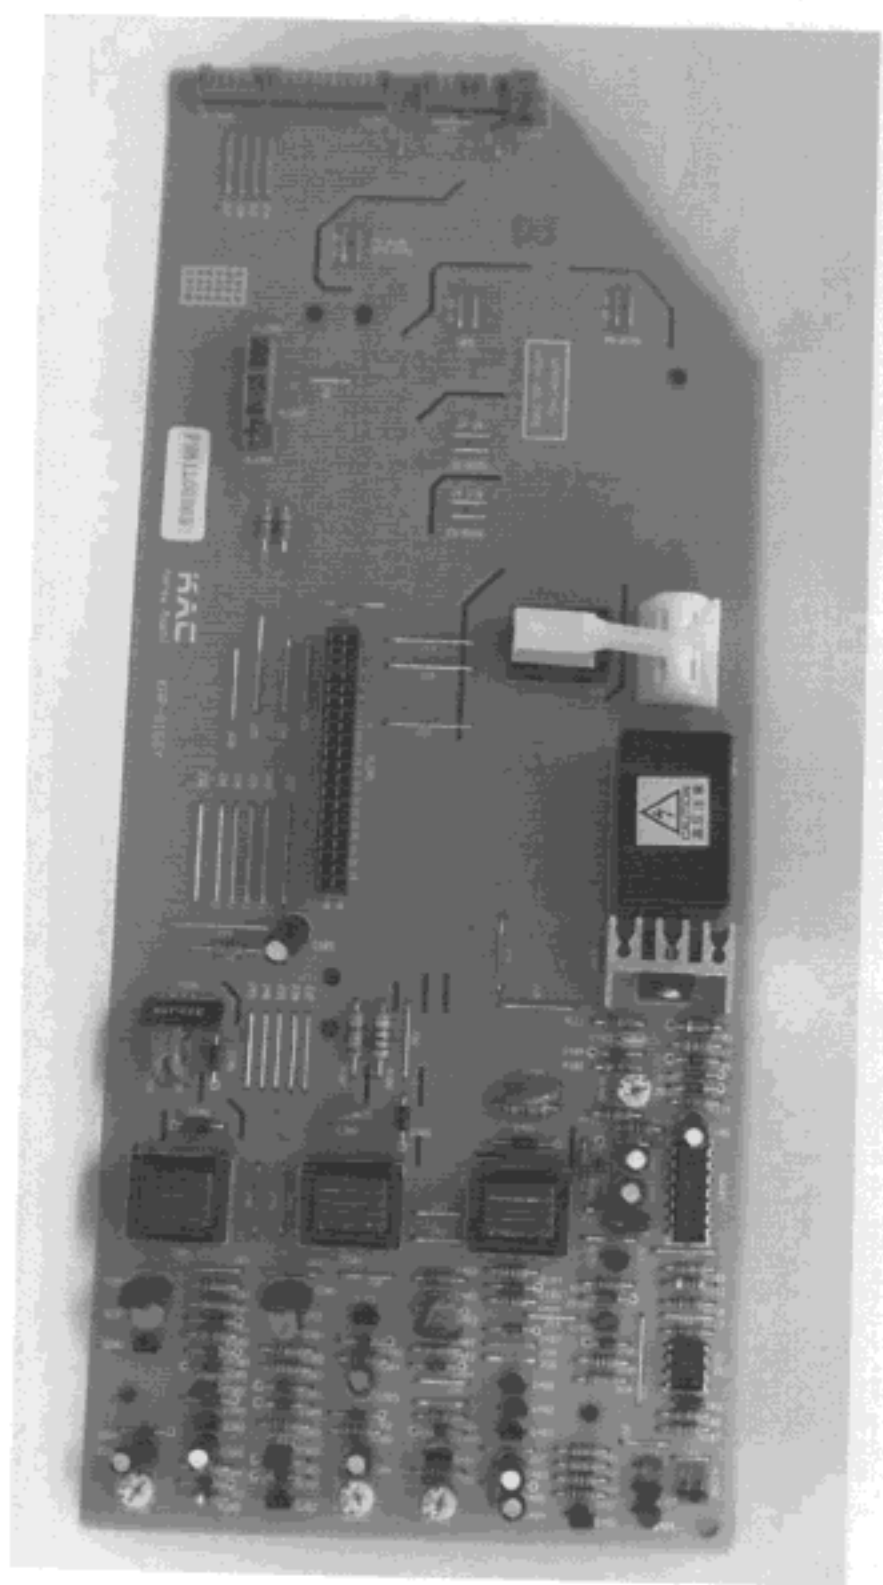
HIGH VOLTAGE BOARD SOLDERING SIDE
